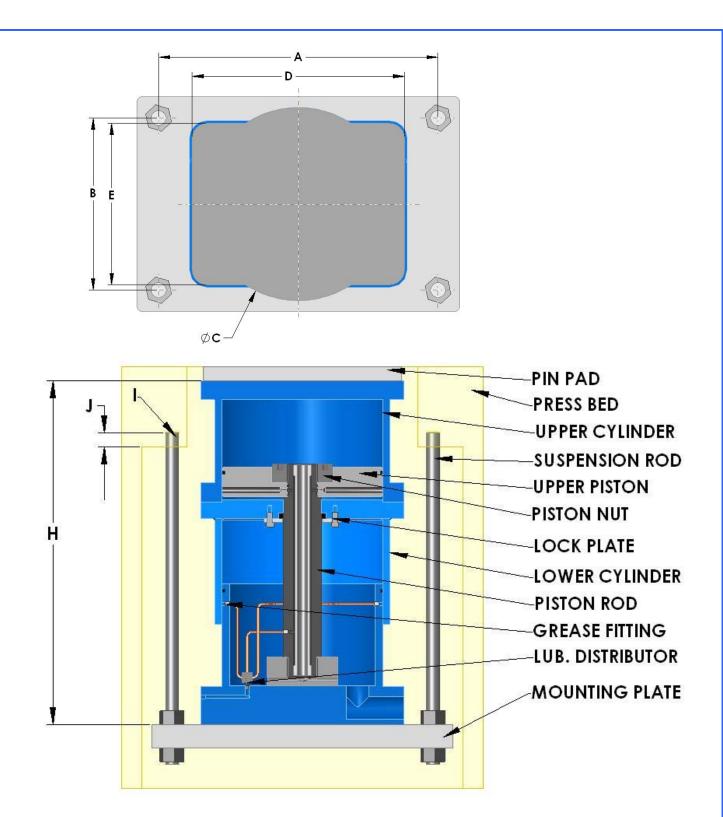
Press bed mounted cushion. Dimensions A and B to be specified by the customer.
